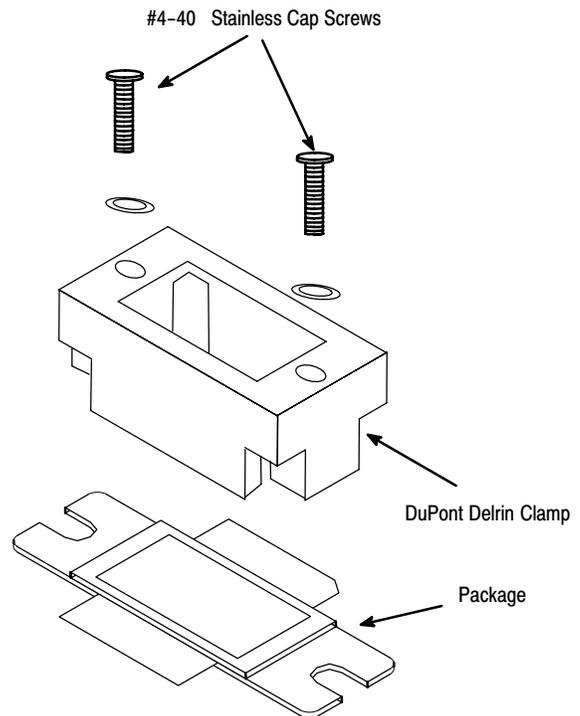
Exploded View of Clamping Scheme for Metal Ceramic Devices
